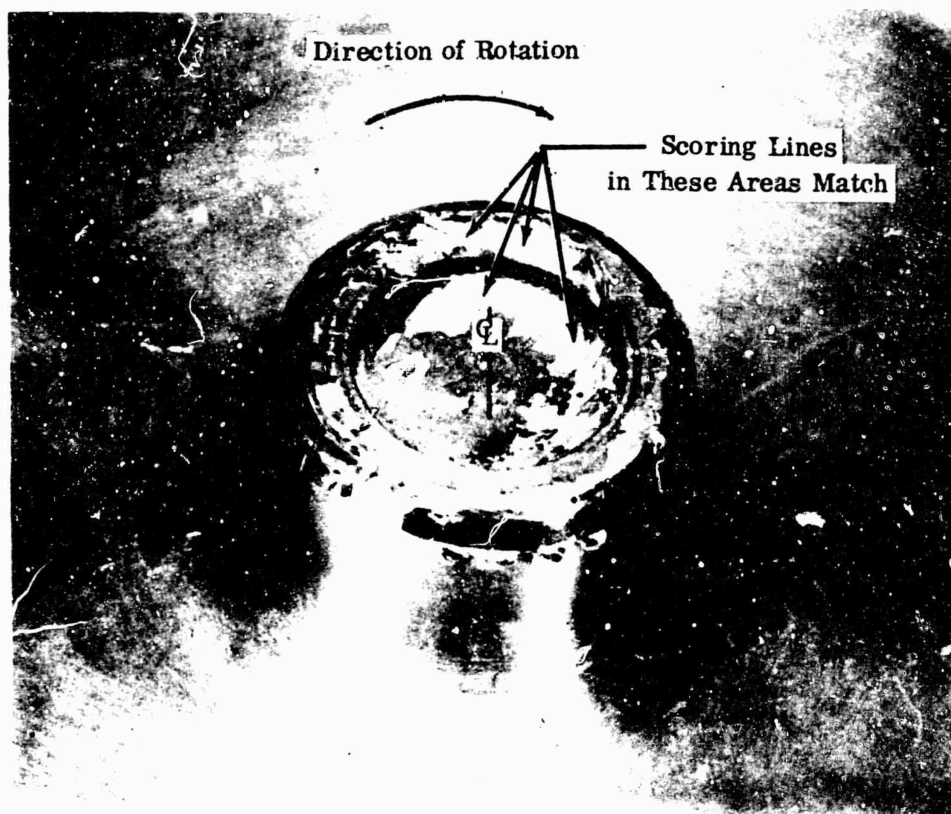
Broken Arbor at the Upper End of Impeller MF-2
